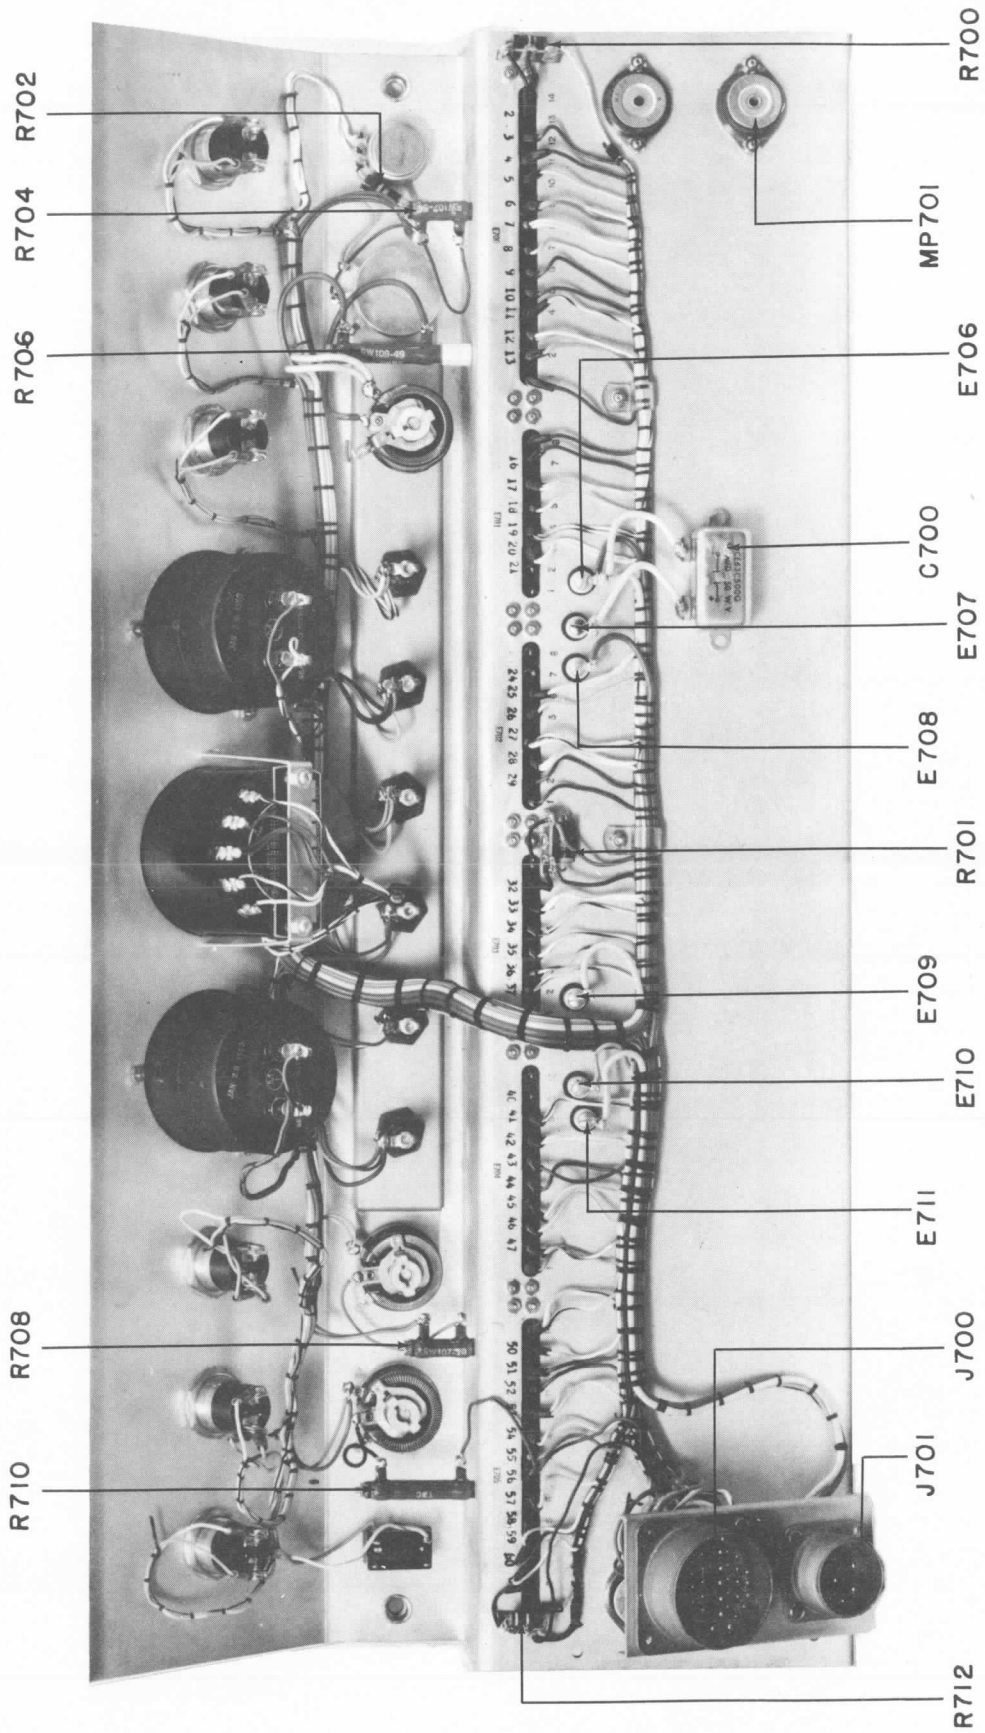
Rear View, Relay and Indicator Control Panels
